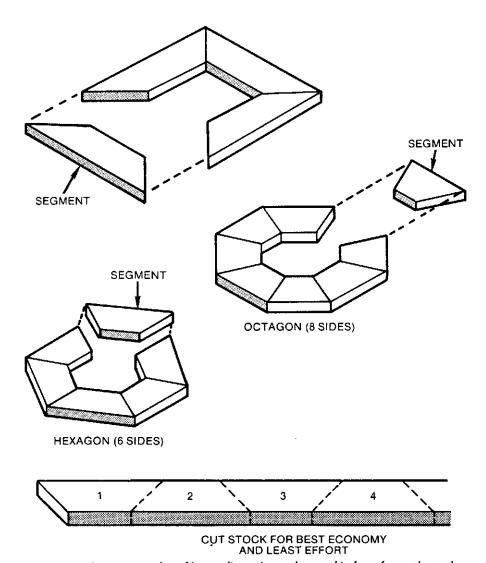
Some examples of how miter cuts can be used to form four-, six- and eight-sided projects.
